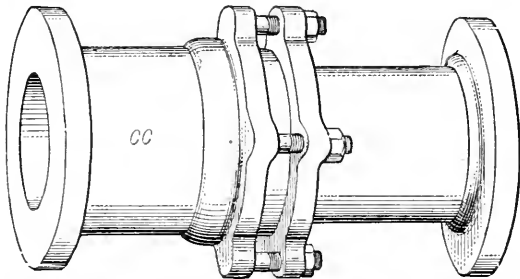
STANDARD UNBALANCED SINGLE EXPANSION JOINT.
